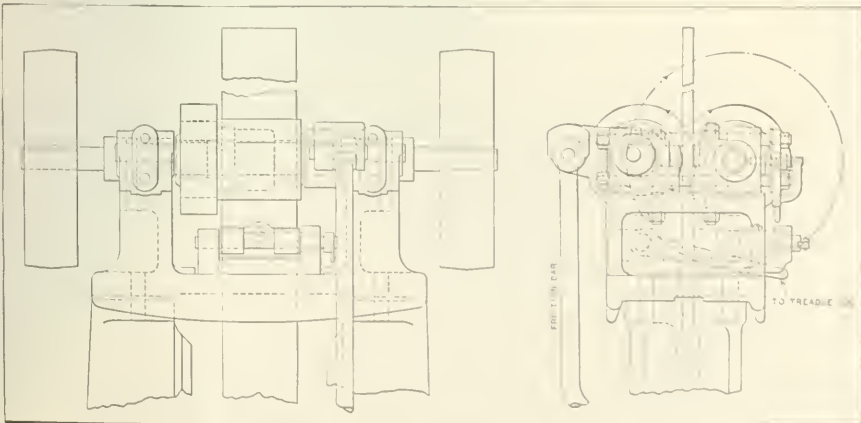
Lifting Head equipped with Geared Friction Rolls
